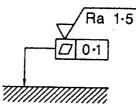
SURFACE TEXTURE REQUIREMENT CON-NECTED TO INDICATION OF GEOMETRICAL TOLERAN-CES
